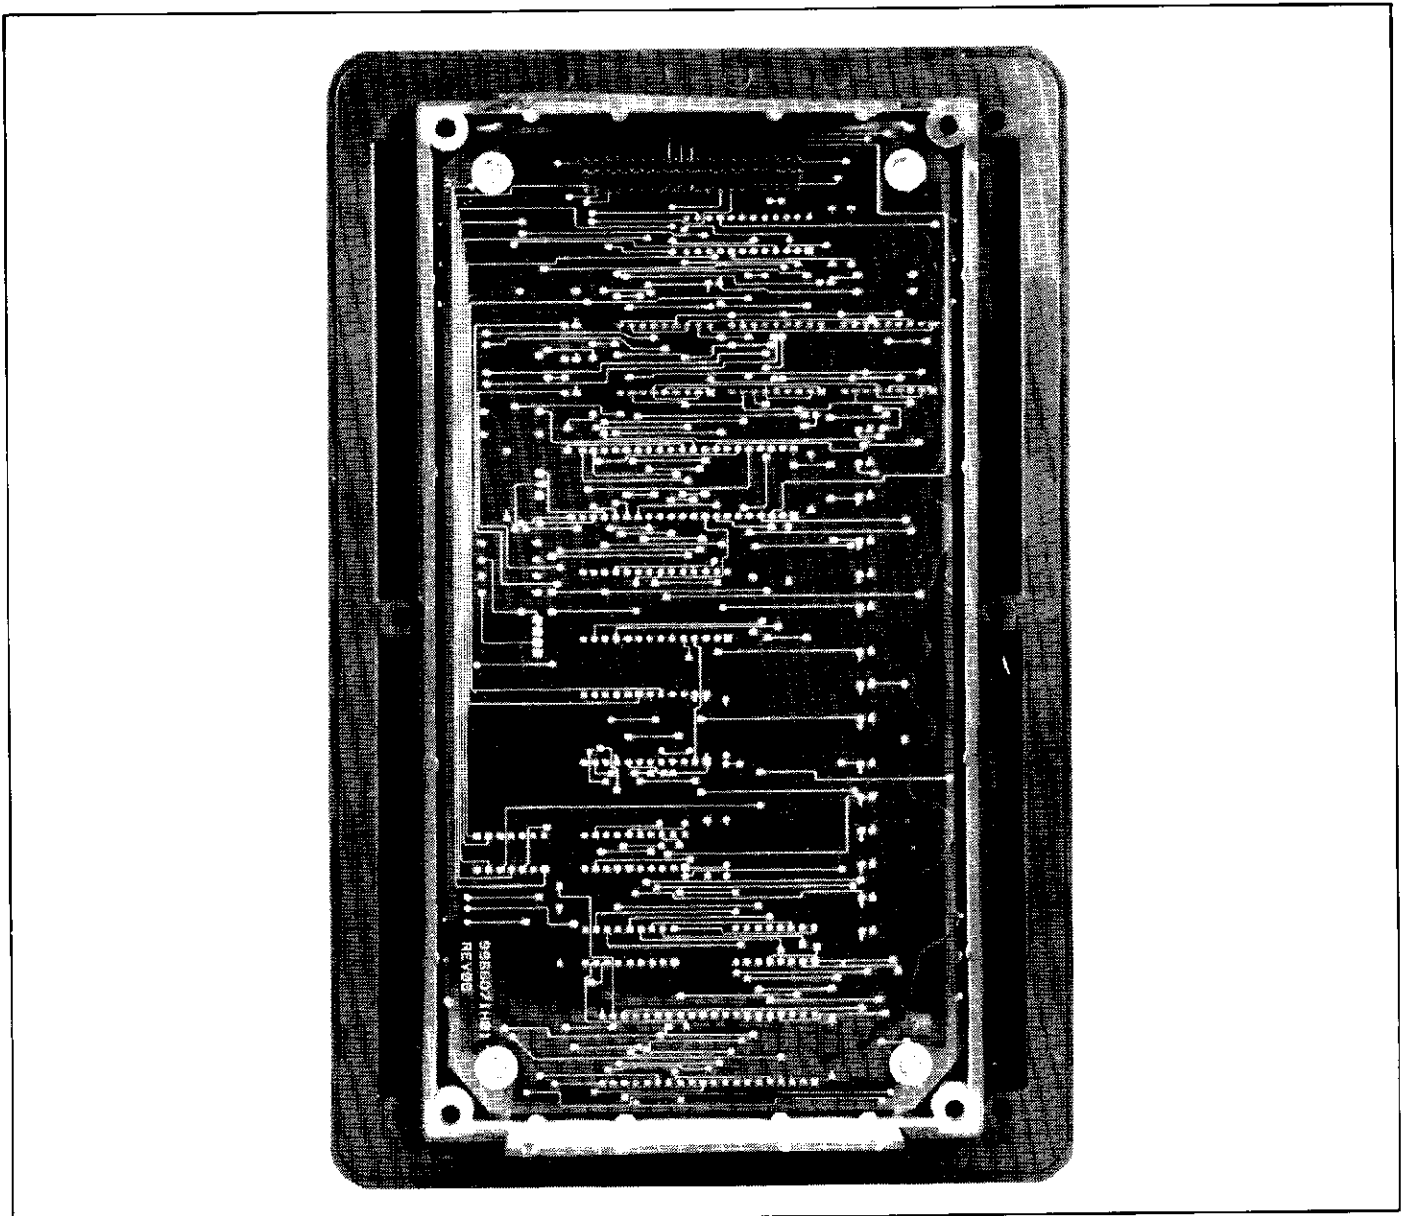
IQ Data Plus II with Cover and Rear Board Removed
